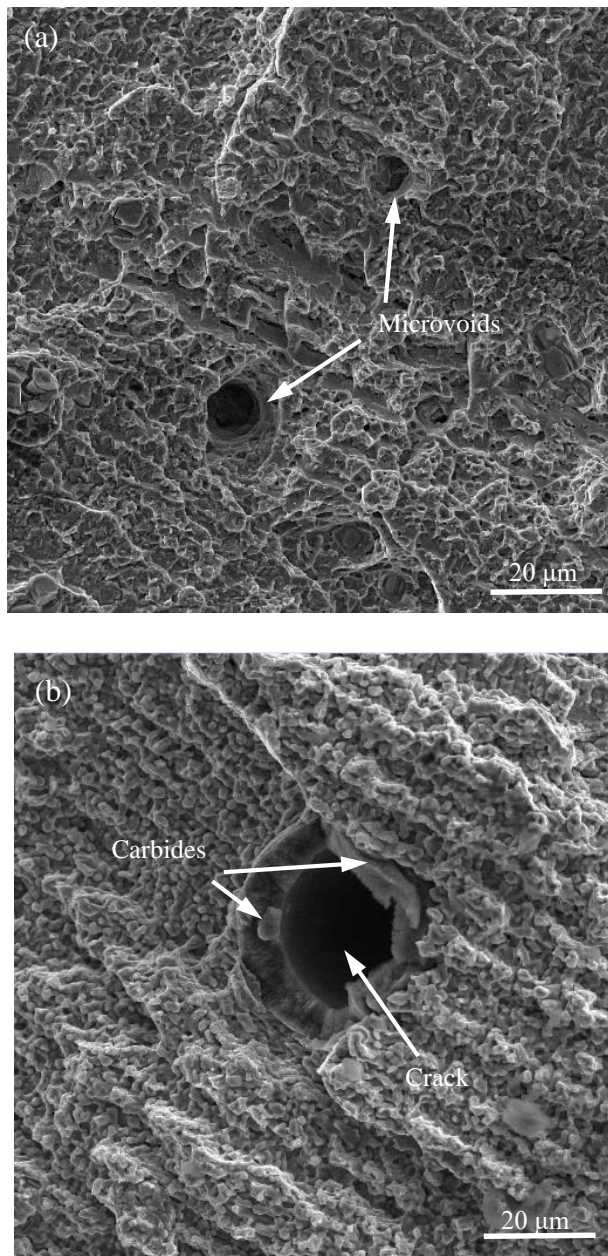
Fracture cross section of the base metal: (a) intergranular fracture, (b) the presence of carbides around the crack.
